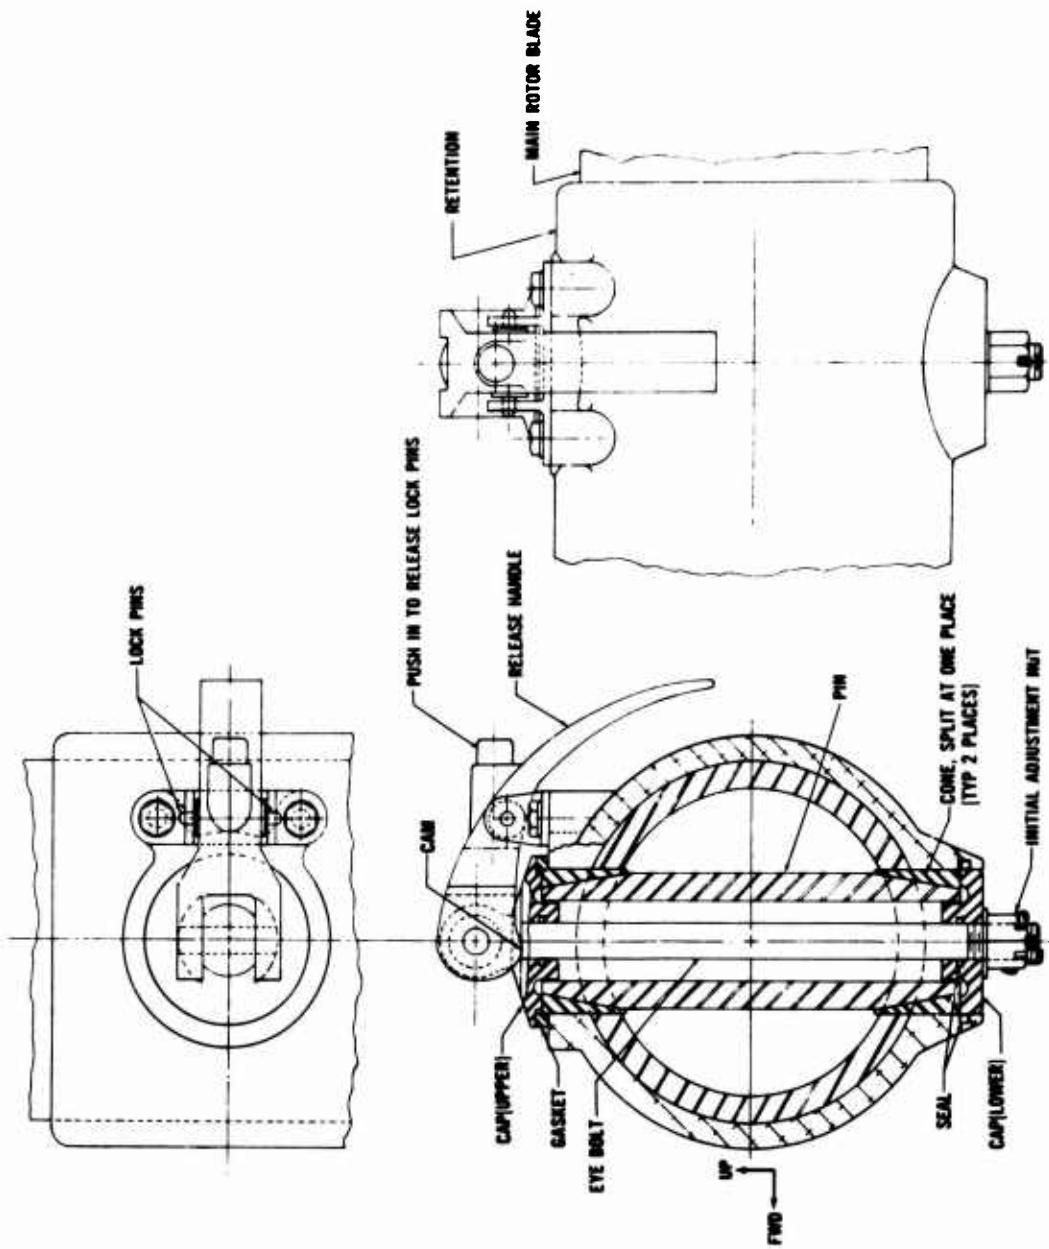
Details of Expandable Bushing Pin Used With Quick Attach/Detach Mechanism for Main Rotor Blades.
